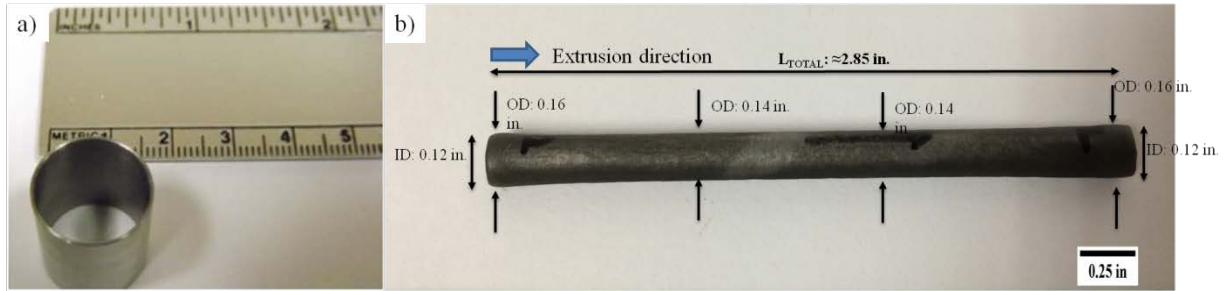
Photos showing the final dimension of the tubes produced by a) Process I and b) Process II.
